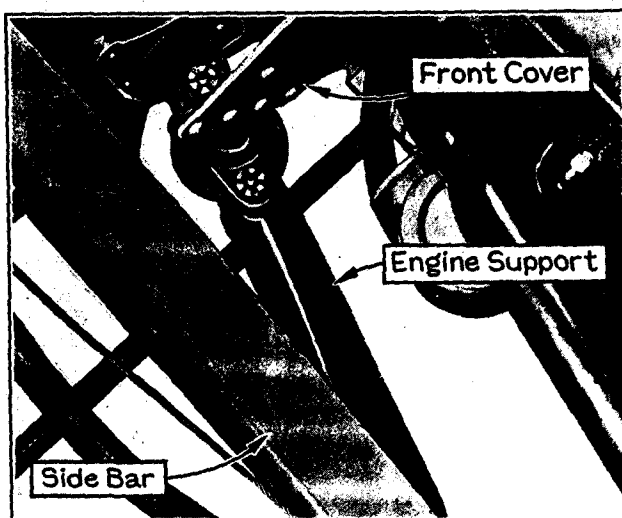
The front engine supports also form the rear bracket for the front spring.
